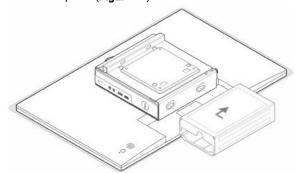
Aligning the screws on the power adapter enclosure and VESA mount
